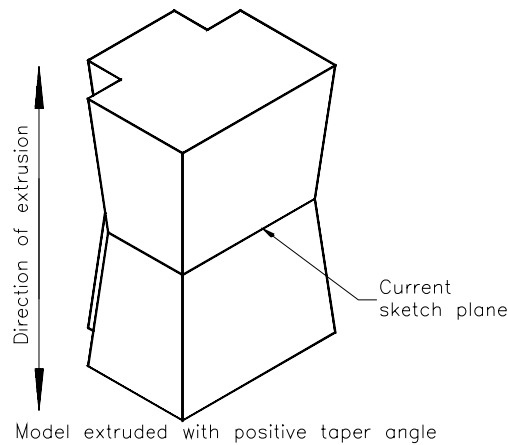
Model extruded with a positive taper angle and using the *Mid-plane* button
